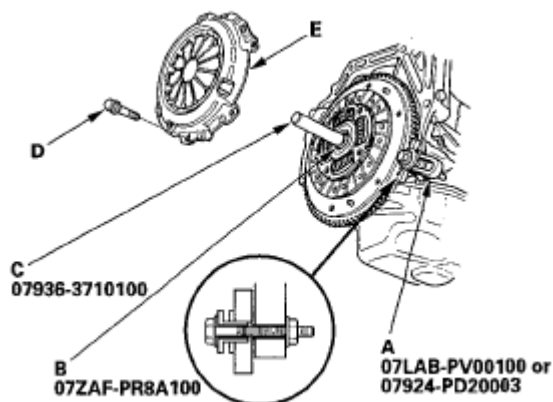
Identifying Ring Gear Holder, Clutch Alignment Shaft And Remover Handle
